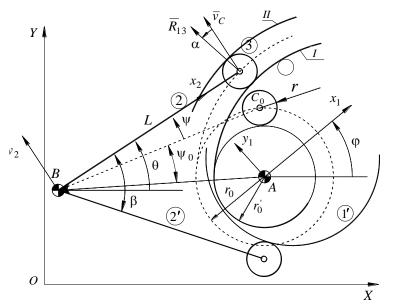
The kinematic diagram of the mechanism with rotating cam and roller follower
